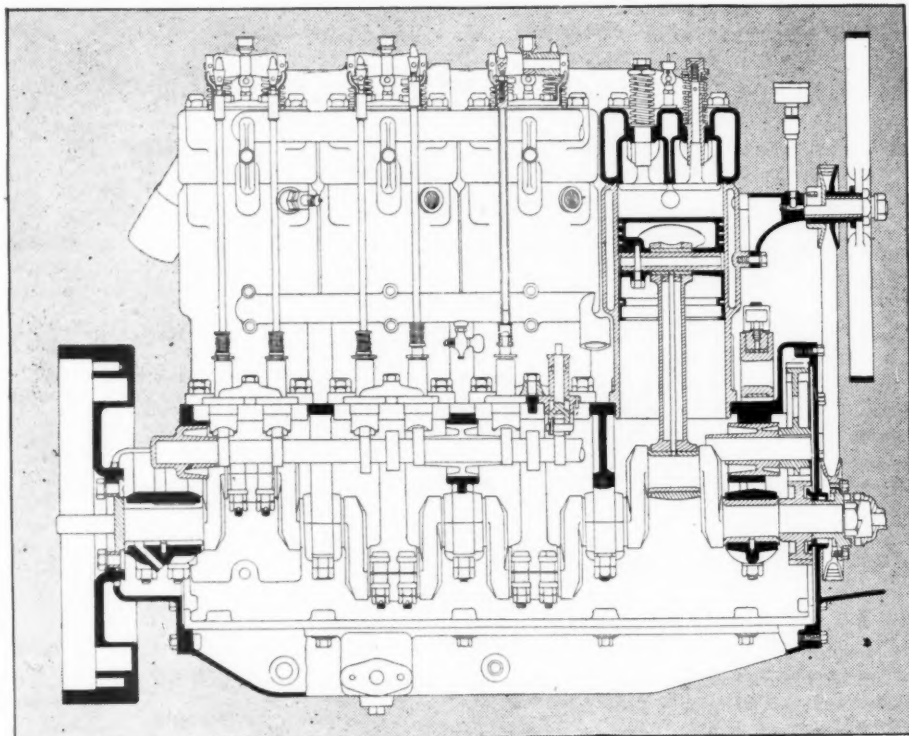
Elevation and part sectional view of Knox four-cylinder motor
